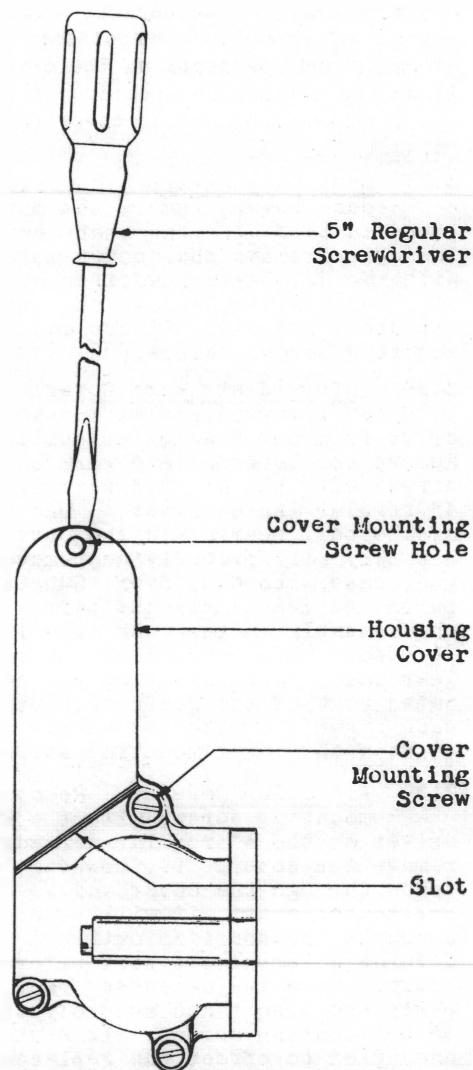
Illustrating Splitting of Alarm Housing Cover
